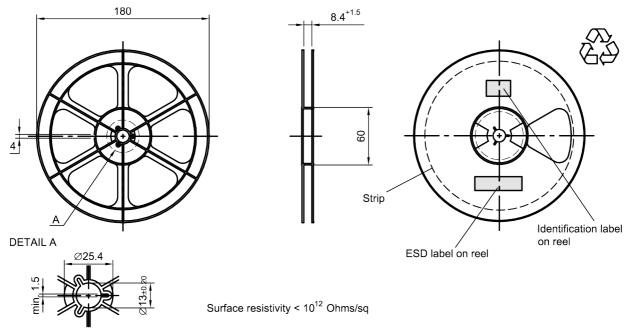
Drawing of reel (first-angle projection) with diameter of 180 mm.
